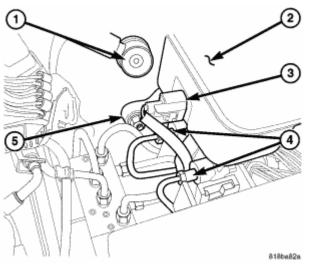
Identifying Reservoir, Fluid Level Electrical Connector, Brake Lines, Mounting Nuts & Booster Check Valve Courtesy of CHRYSLER LLC
